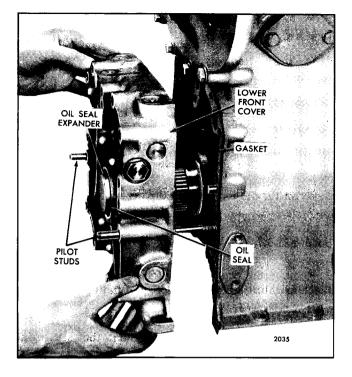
Installing Lower Engine Front Cover -- In-Line Engine
